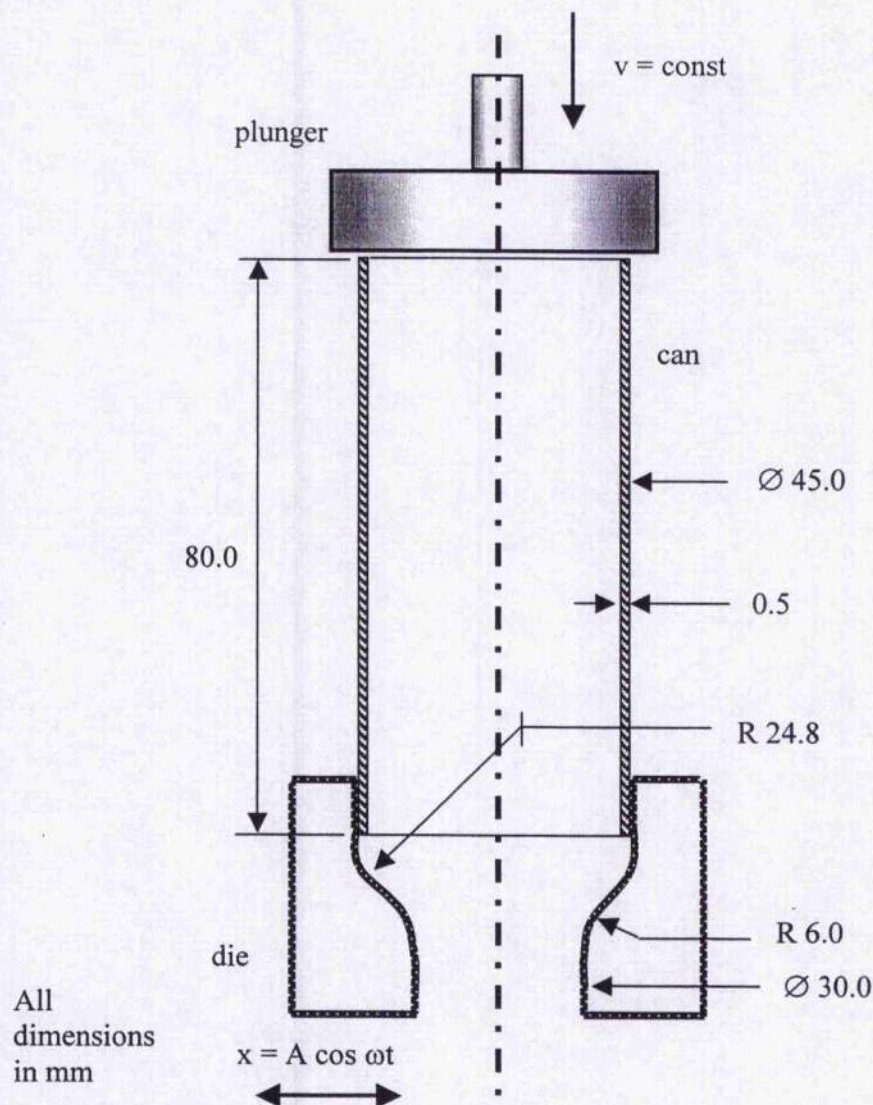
Problem description for hollow thin cylinder die-necking process, dimensions in mm.
